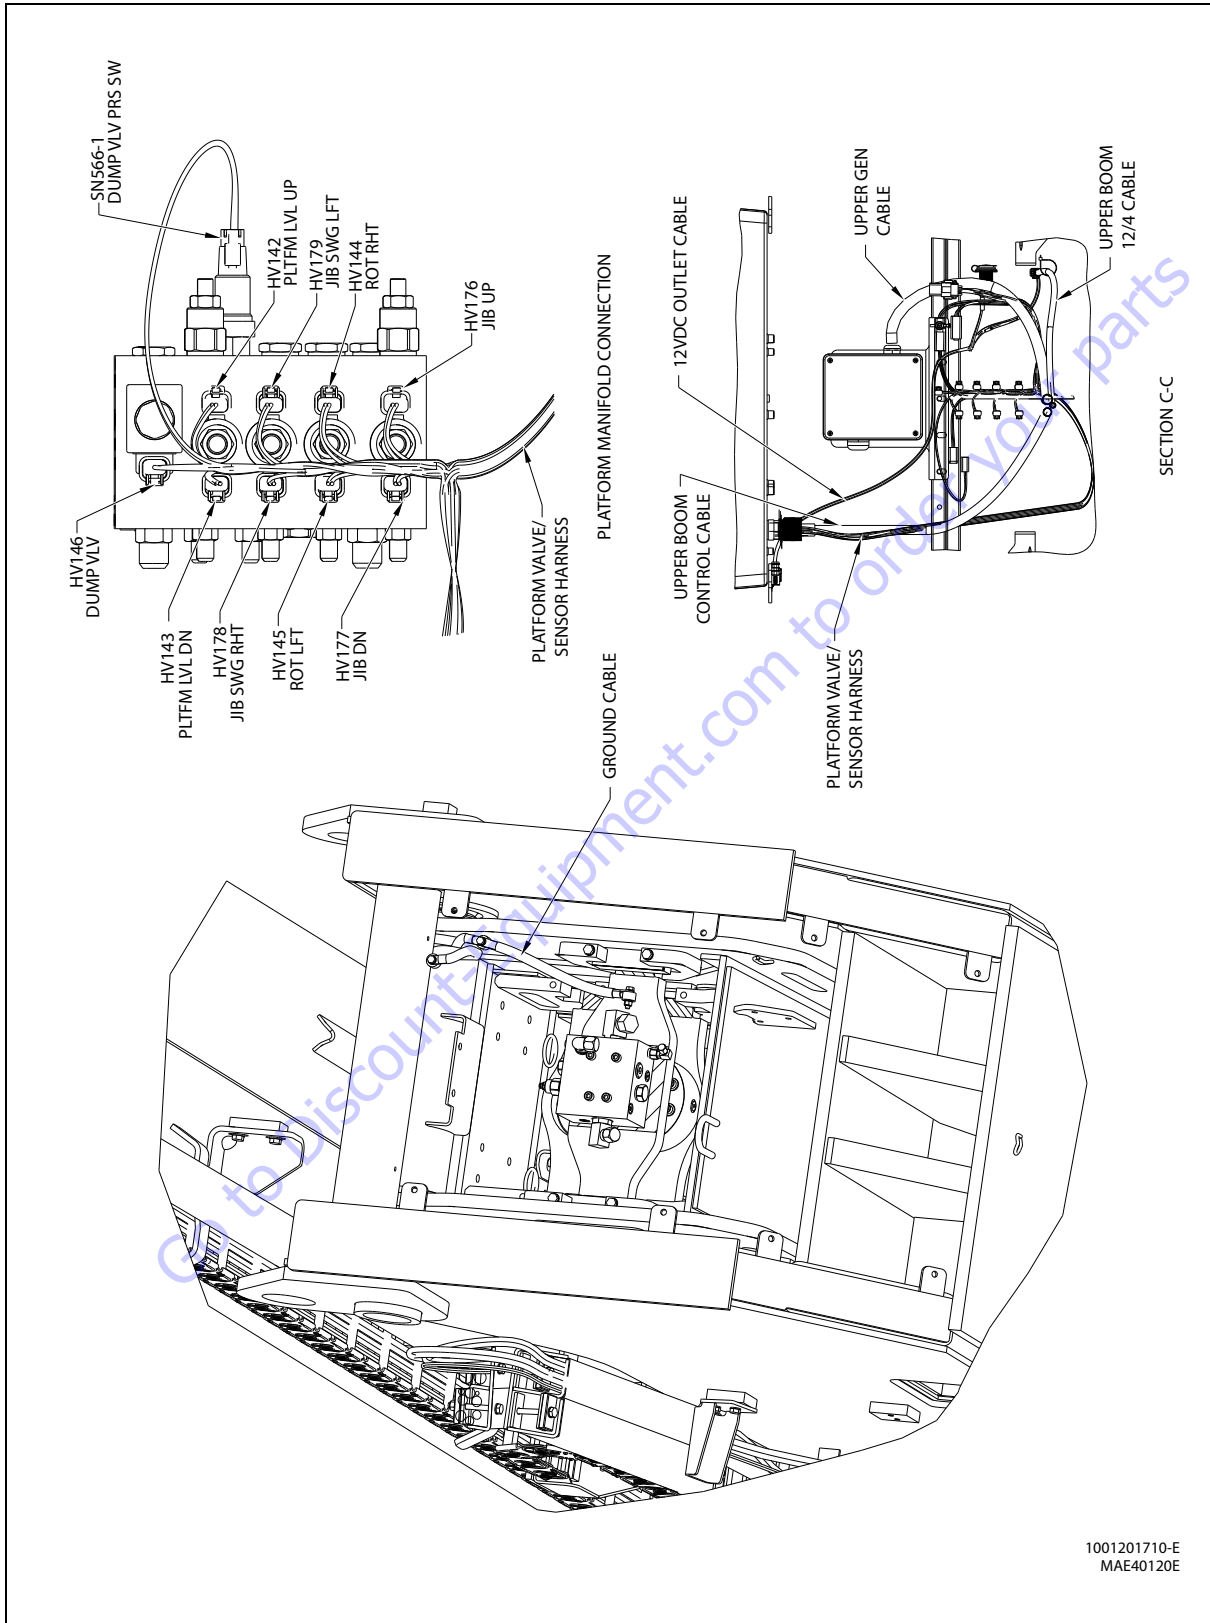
Boom Electrical Installation (4000W Generator) - Sheet 5 of 5
